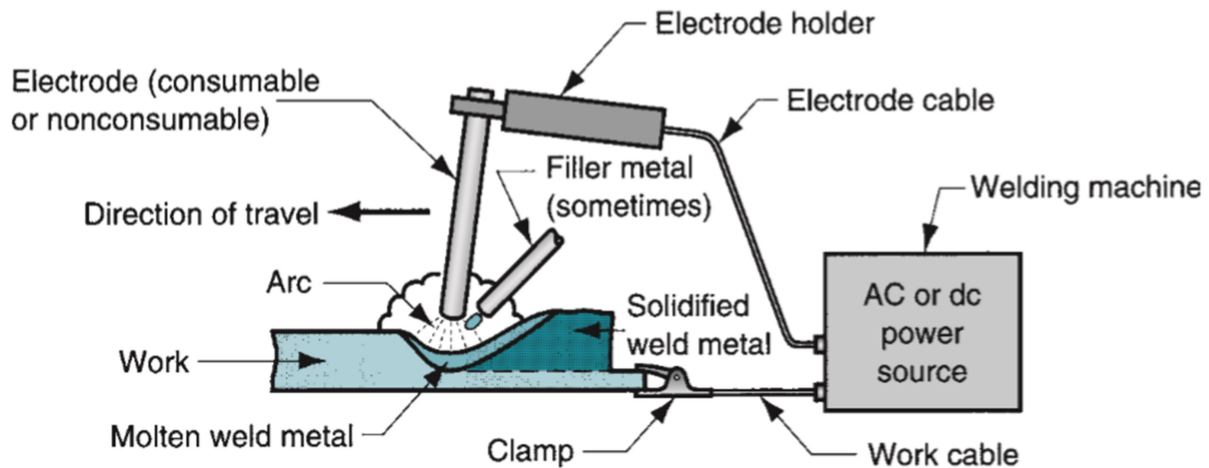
The basic configuration and electrical circuit of an arc welding process.
